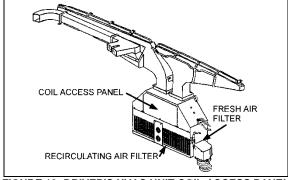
DRIVER'S HVAC UNIT COIL ACCESS PANEL
